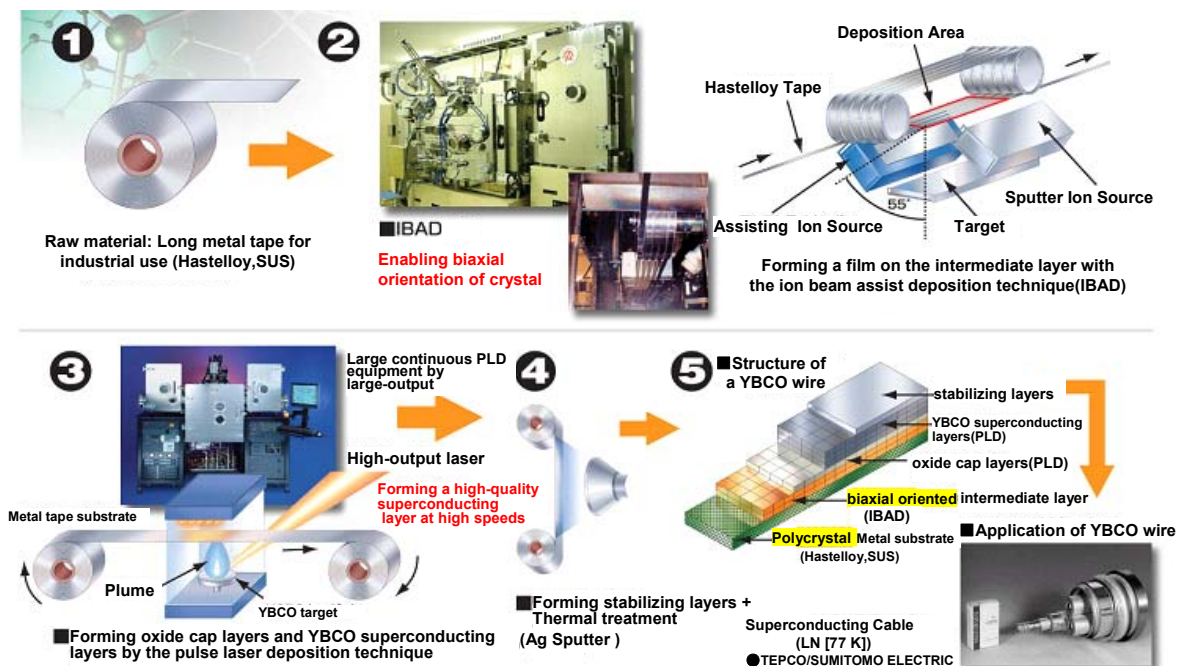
Integrated wire fabrication process with the IBAD-PLD technique
